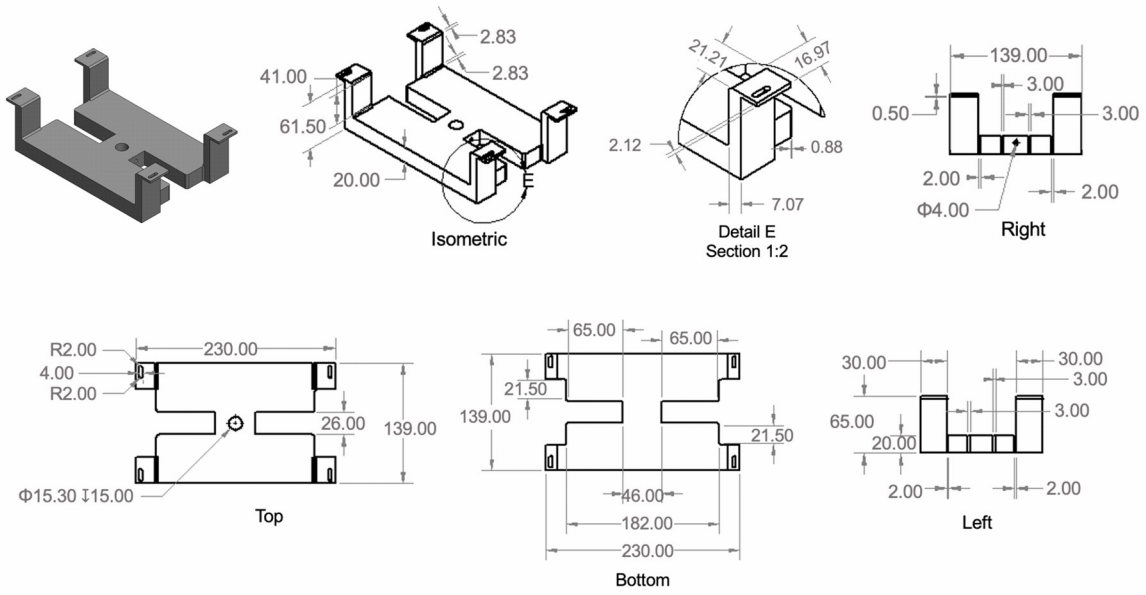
CAD illustration of different views of base plate fixture (dimensions are in millimetres).
